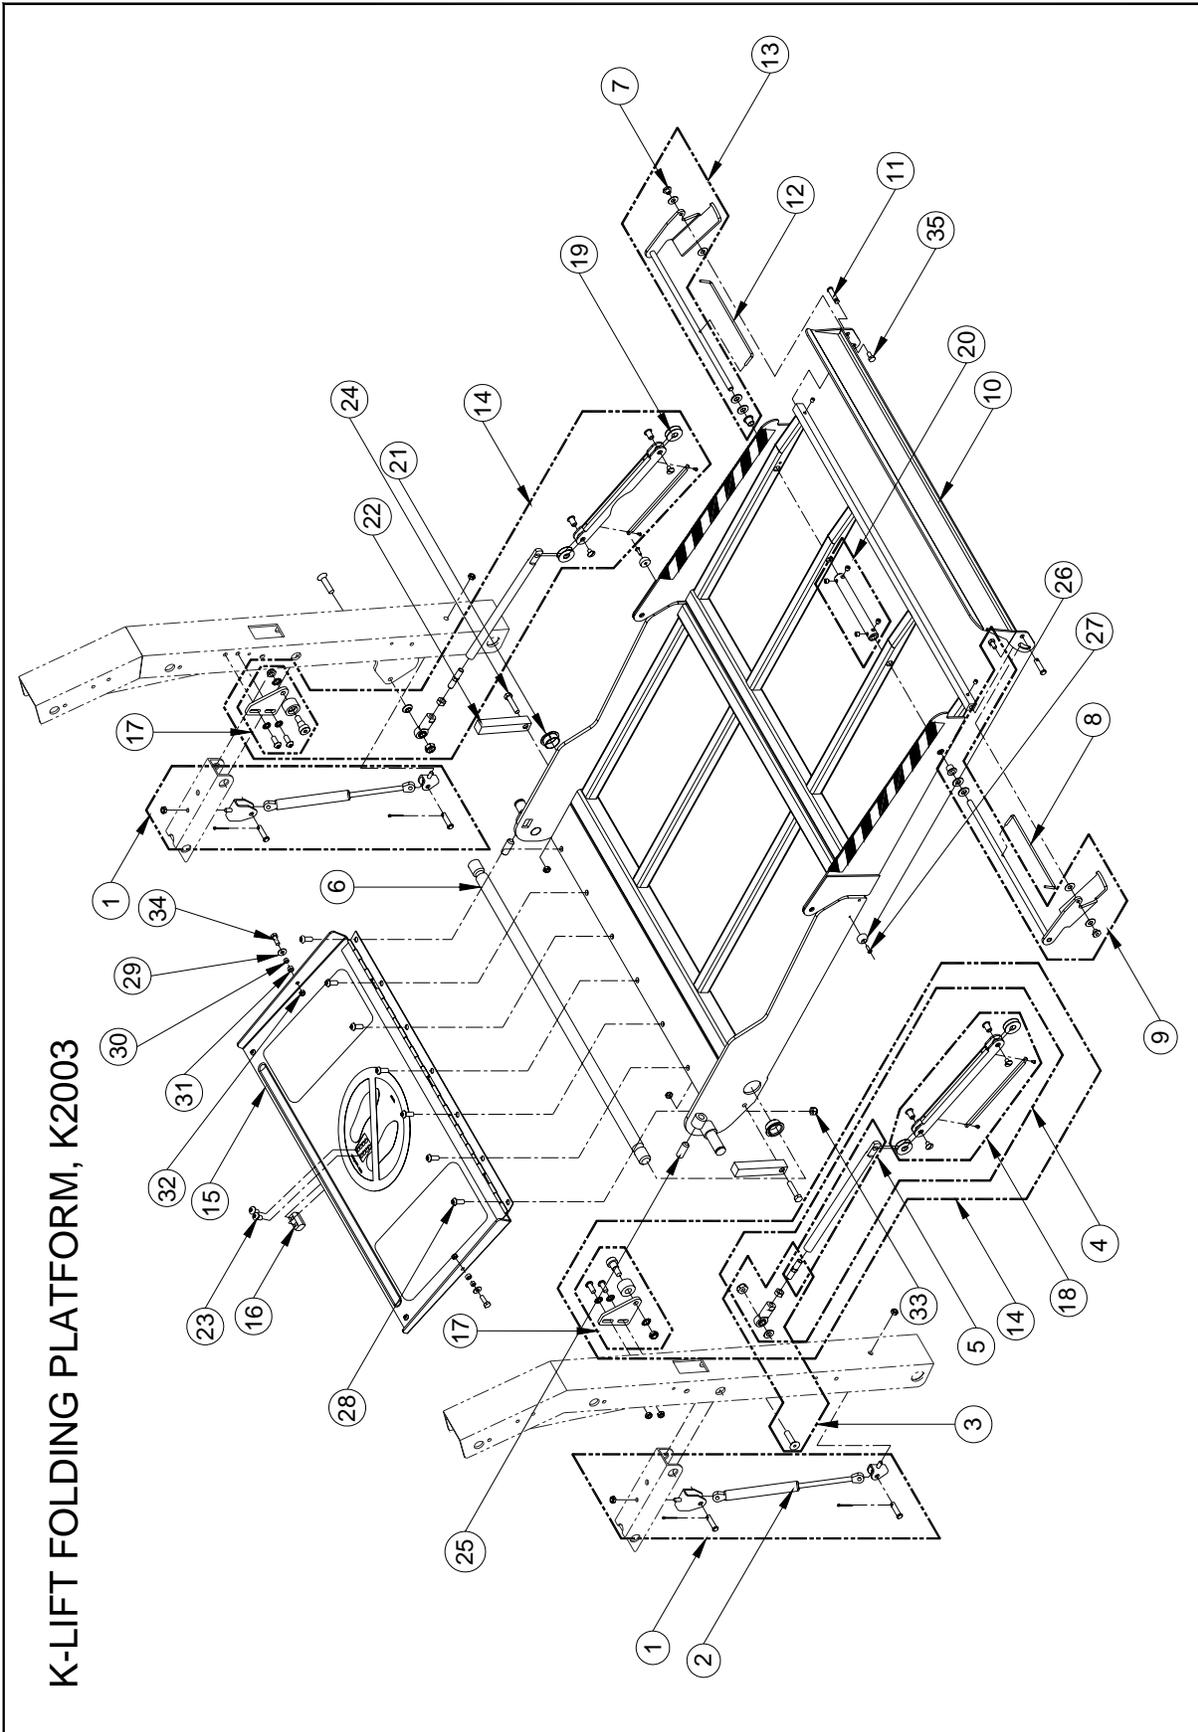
FOLDING PLATFORM ASSEMBLY, K2003
